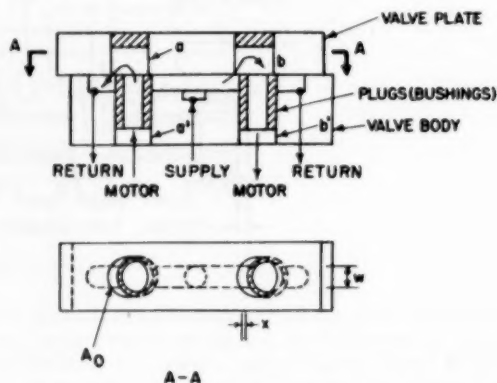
SCHEMATIC DRAWING OF FOUR-WAY VALVE USING HOLE-AND-PLUG-TYPE METERING ORIFICES
